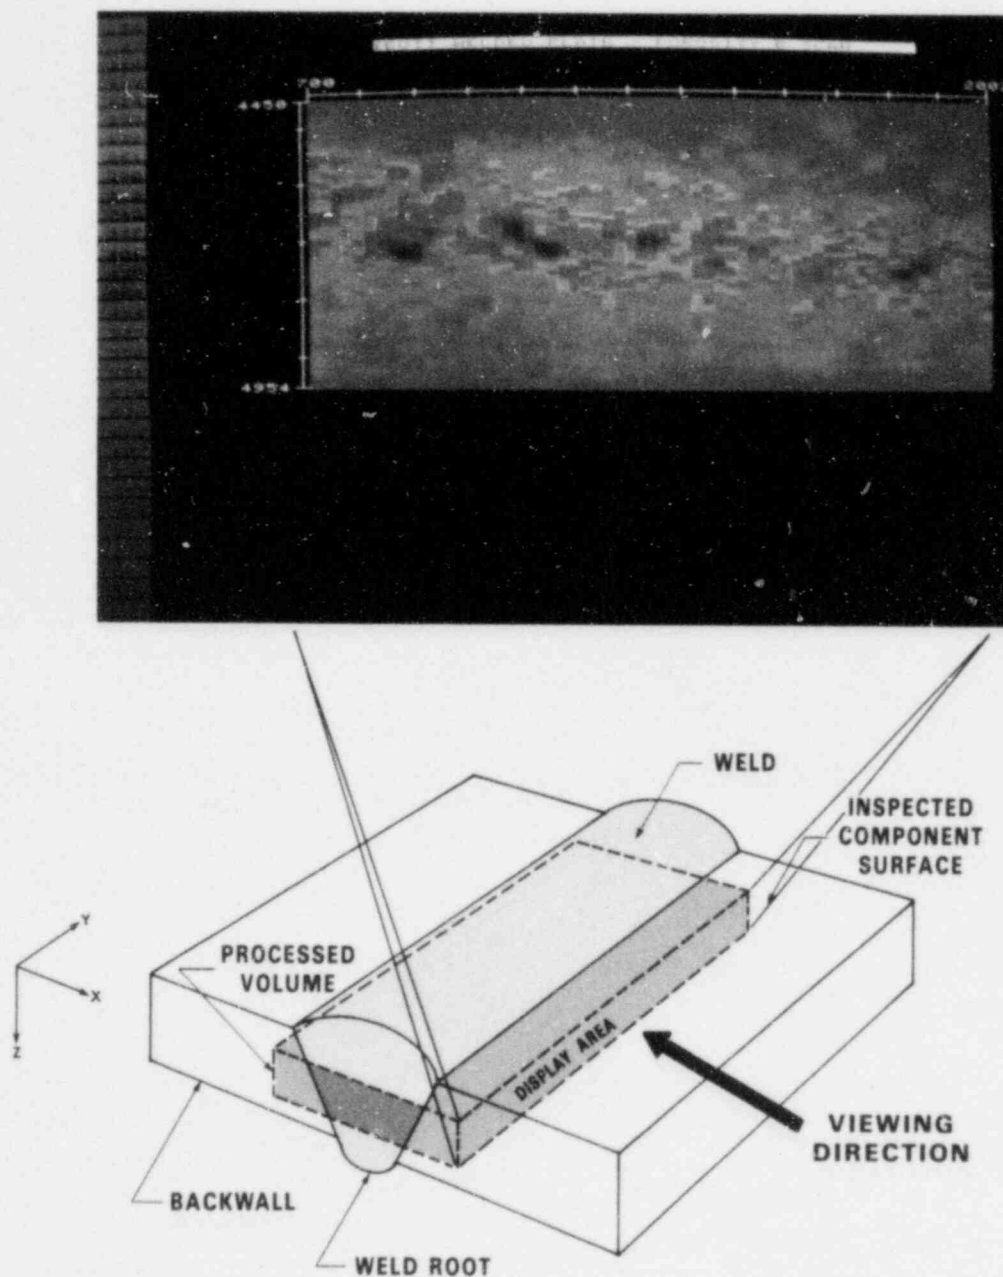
BUTT-WELDED CARBON STEEL PLATE SPECIMEN - POROSITY
